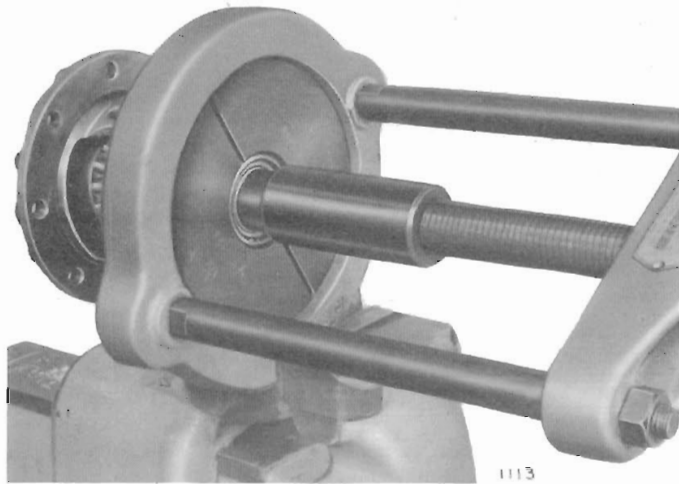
Using Churchill press and adaptor ring S102 to remove the crown wheel carrier bearings
